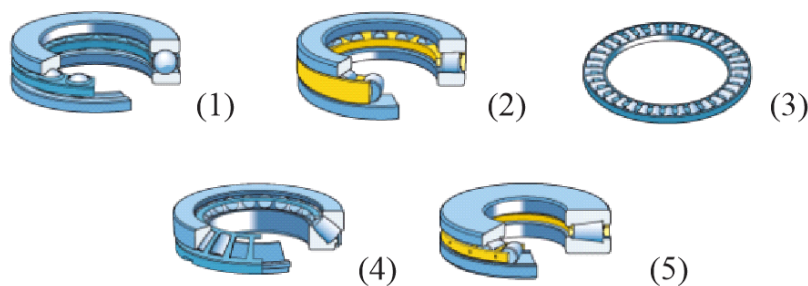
SKF types of rolling element bearings . From left top to right bottom : Ball (1), Cylindrical (2), Needle (3), Spherical (4) and tapered (5). Available at [1]
